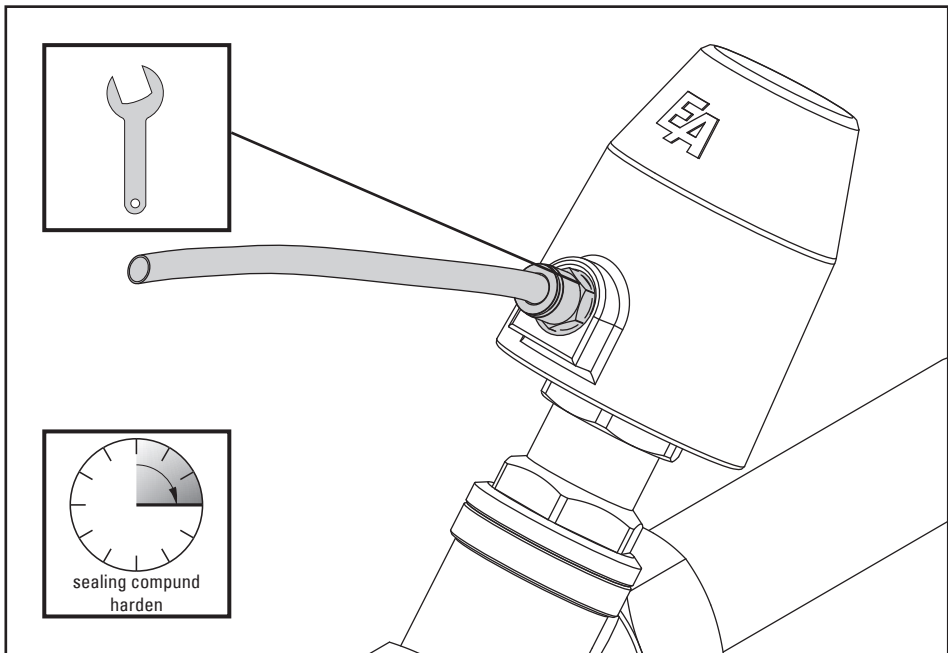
mounting/disassembly - connection of the pilot medium
